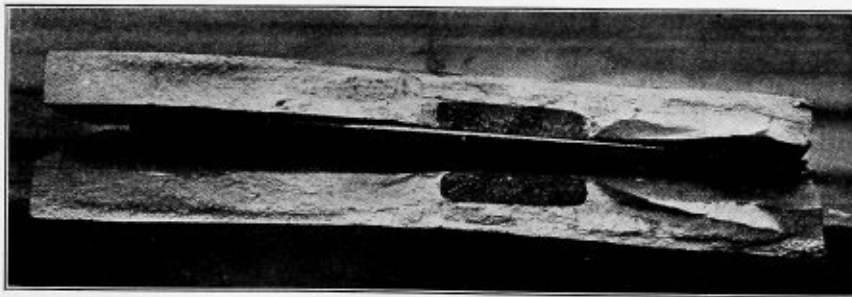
Piece of Shell Plate Broken Through "Bubble" Shaped Crack
